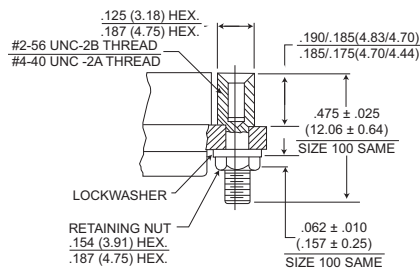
Jackpost Assembly Size 9-51 Size 100
